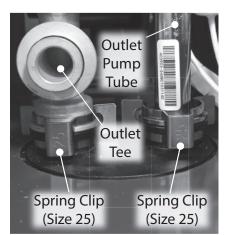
Spring Clips (Size 25), Outlet Tee & Outlet Pump Tube
